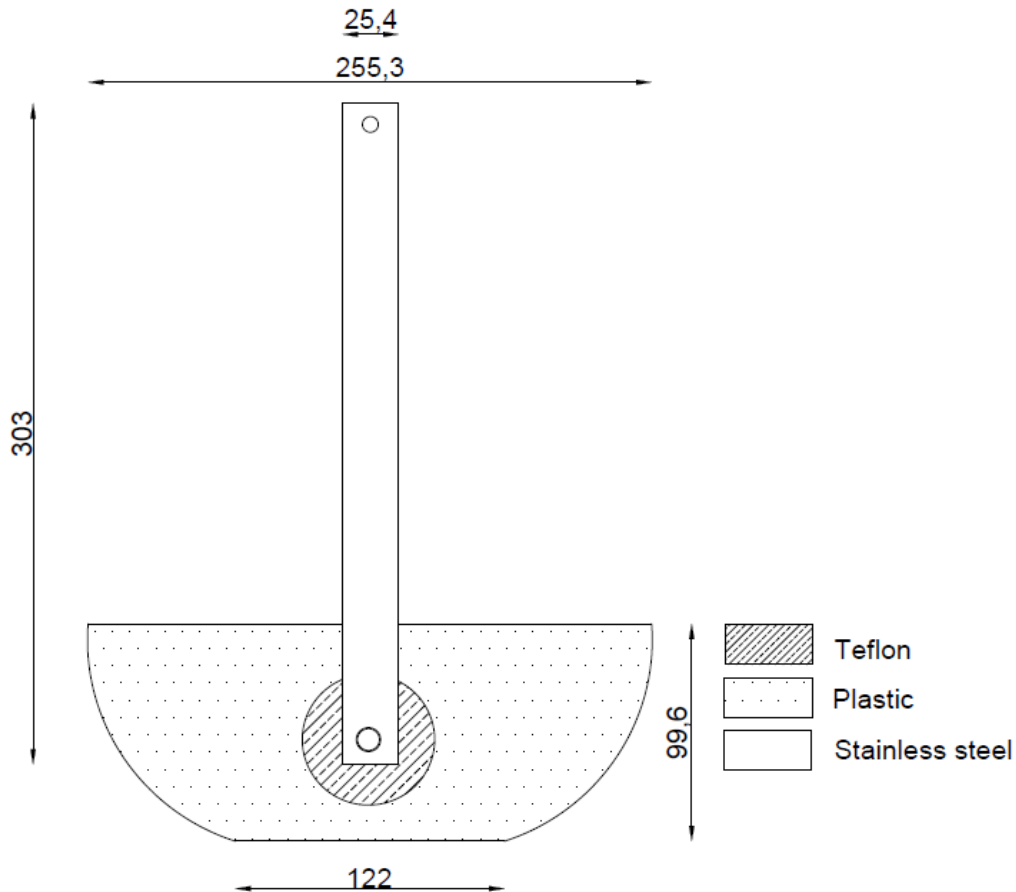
Mechanical drawing of Unit 3 – washing unit (cross-sectional front view; dimensions in mm)
